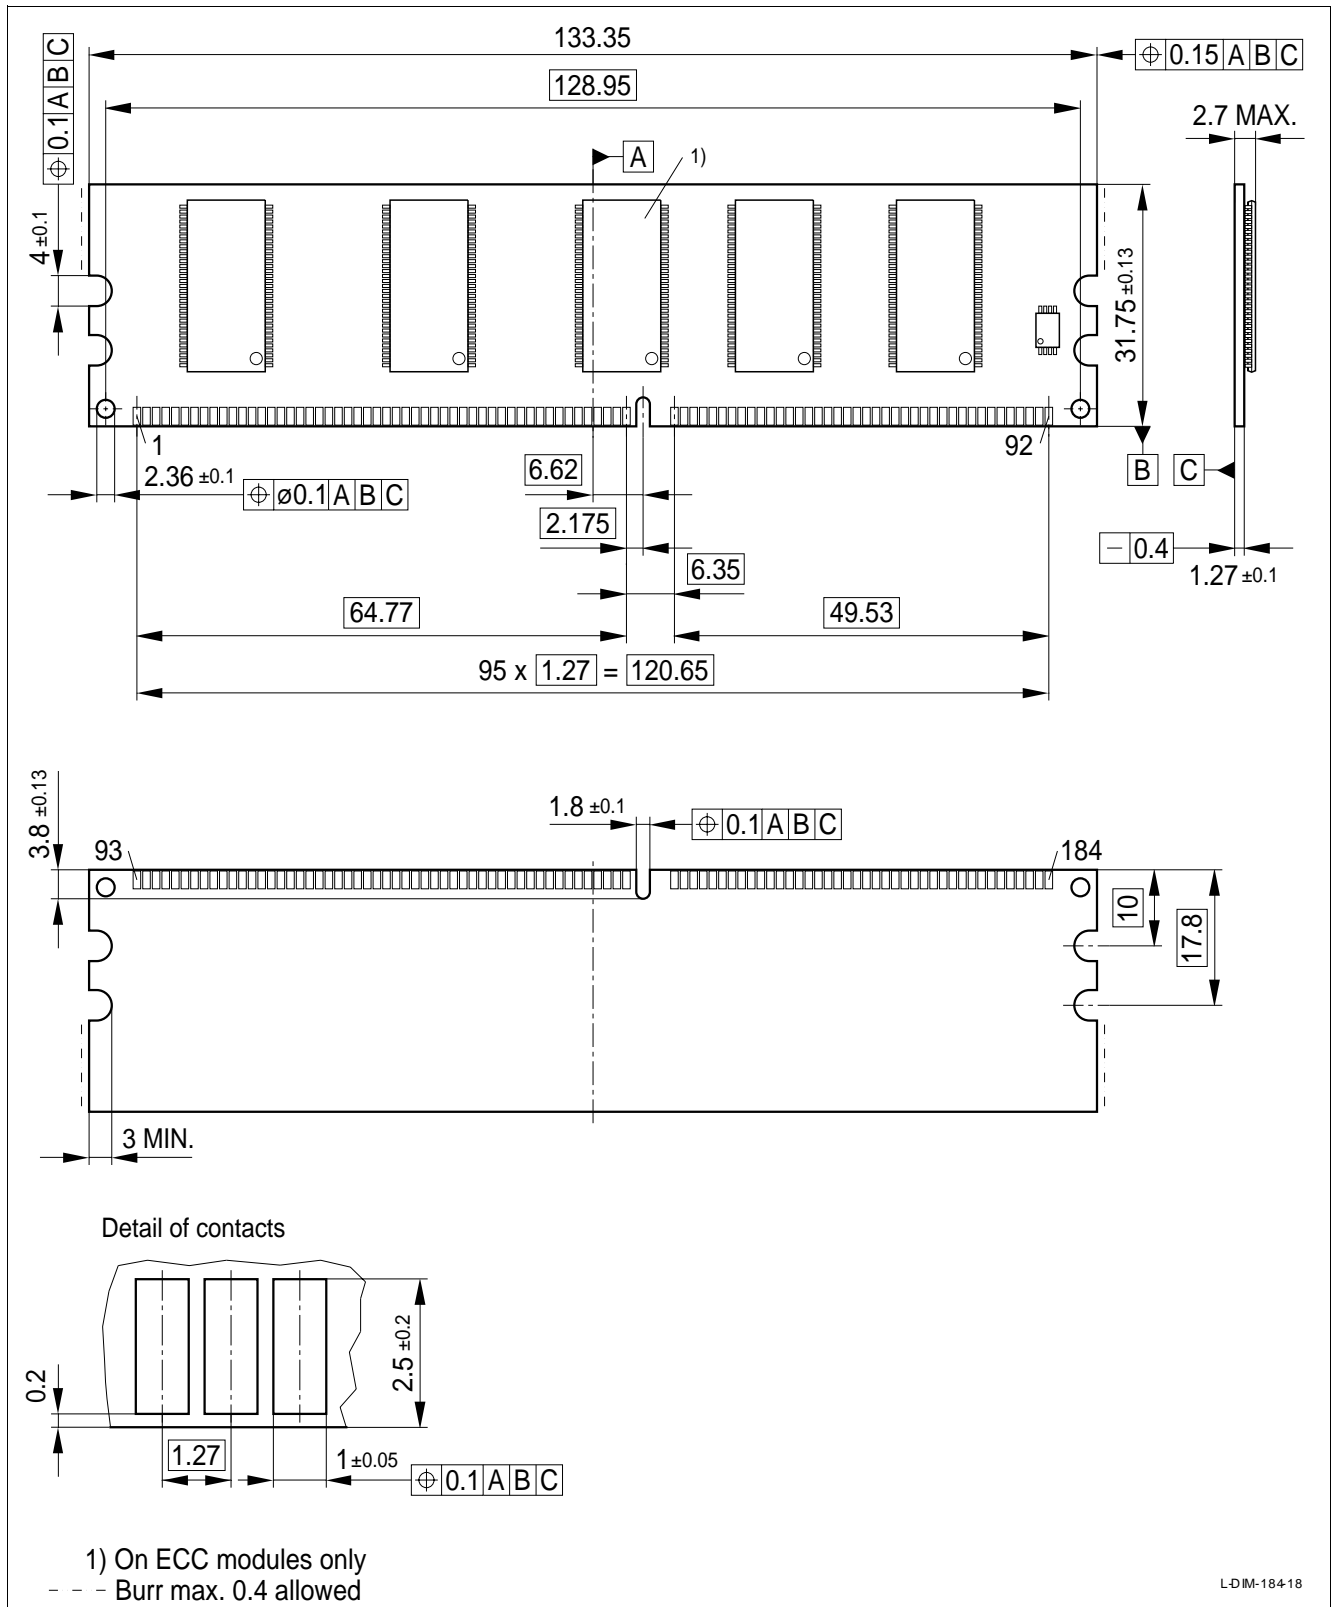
Package Outlines - Raw Card C (128 MByte, 1 Rank Module)
